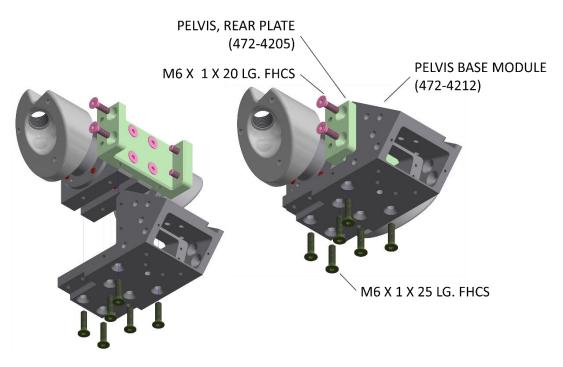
Pelvis Base Module/Load Cell Mounting Plates Assembly
